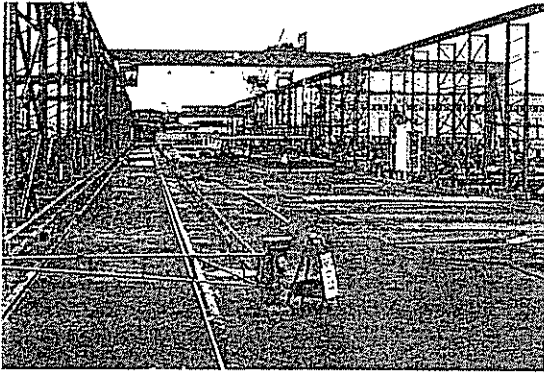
Top-running bridge crane (courtesy National Steel and Shipbuilding)
